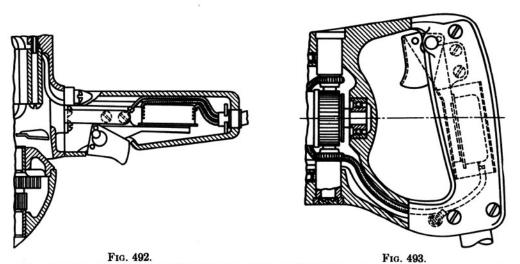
A modern-type commercial switch mounted in a side handle. Such switches are readily replaced as a unit, inexpensive, and sealed against the entrance of dirt. The switch opens as soon as the trigger is released unless the locking pin is set, in which case a slight pull on the trigger releases the locking pin and opens the switch.
